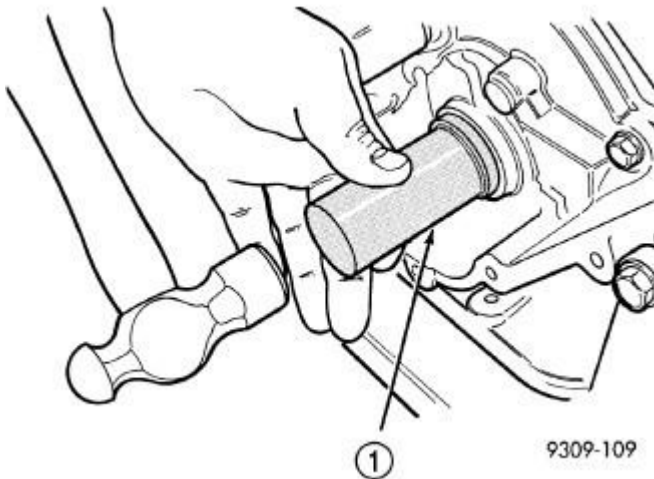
Crankshaft Oil Seal with Special Tool 6342 - Installation
